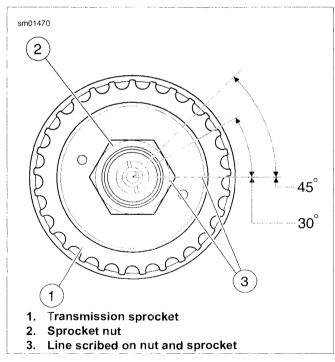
Transmission Sprocket Nut Final Tightening Procedure
